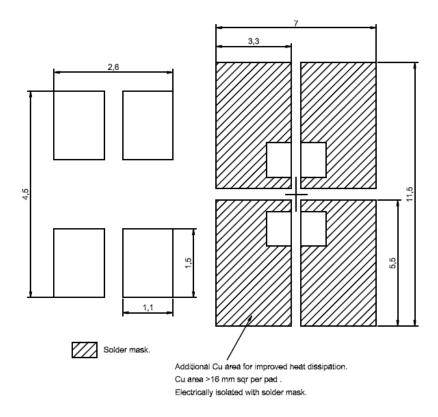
Recommended PCB solder pad layout for SignalSure 150 AM
